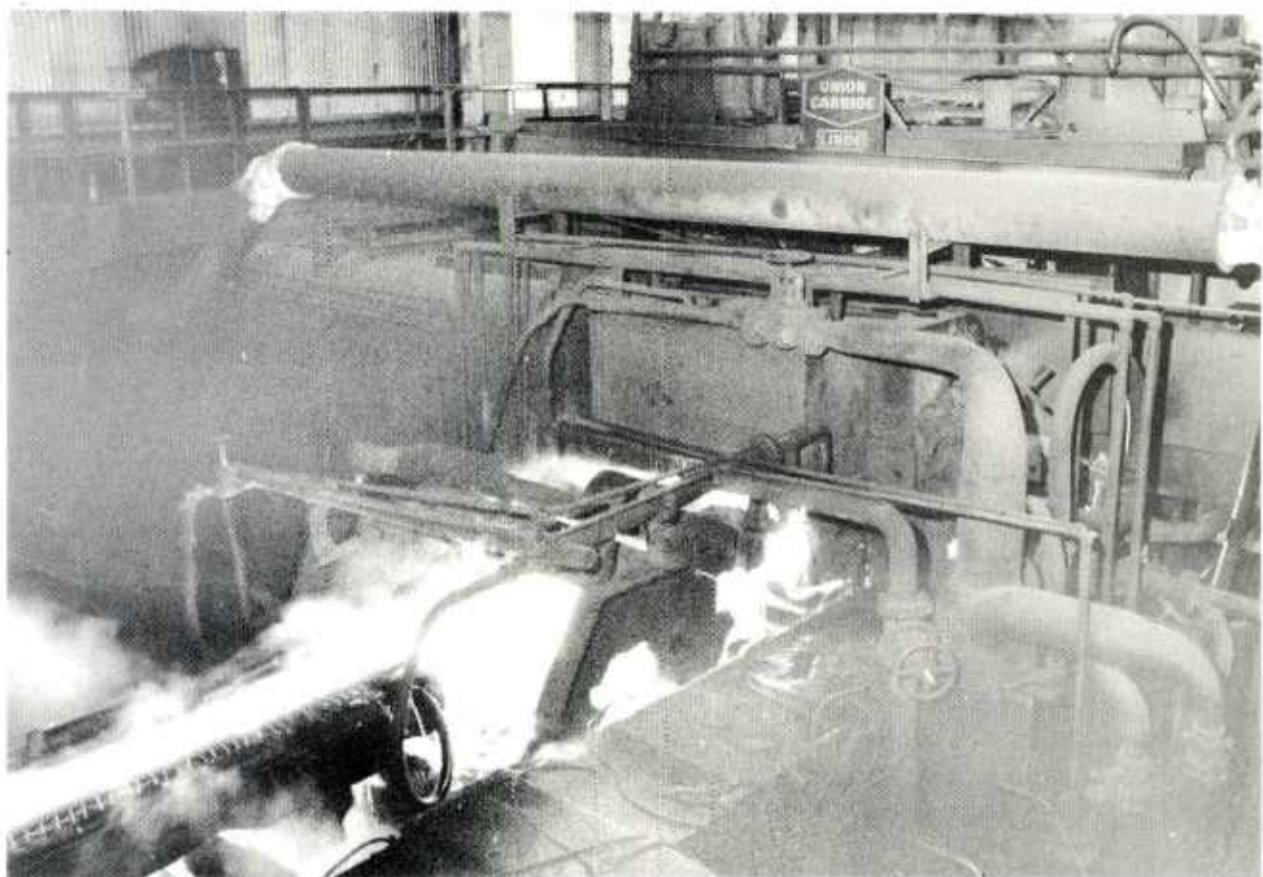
44 inch Scarfer Removing Surface Defects
